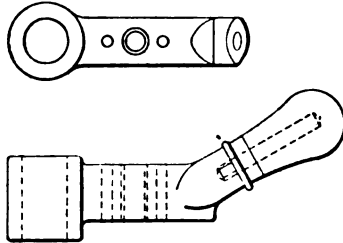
Work to be Drilled in Jig, Fig. 60.
